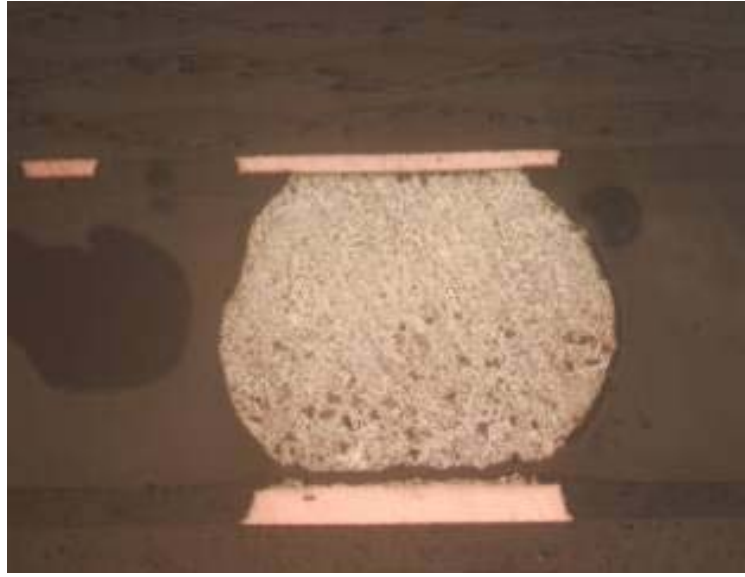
A cross-section image of the solder joint in Figure 2.9
